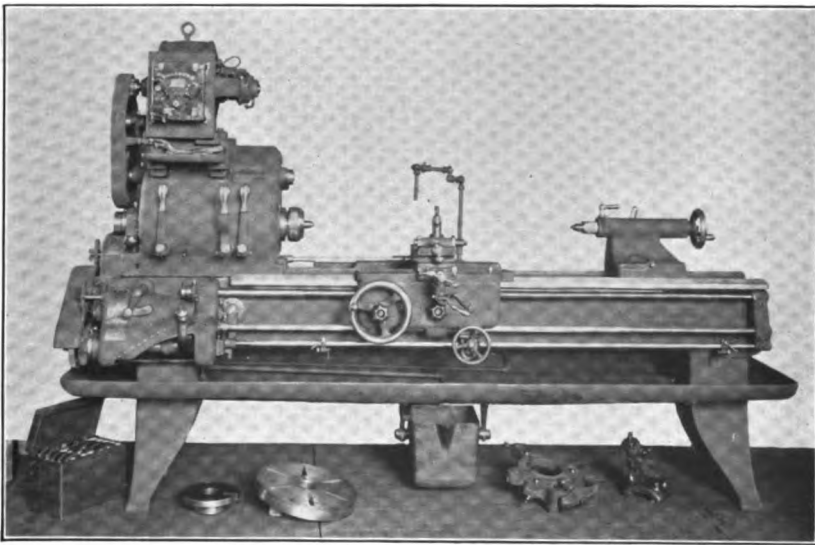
PRATT &amp; WHITNEY 16-INCH MOTOR-DRIVEN ENGINE LATHE.
